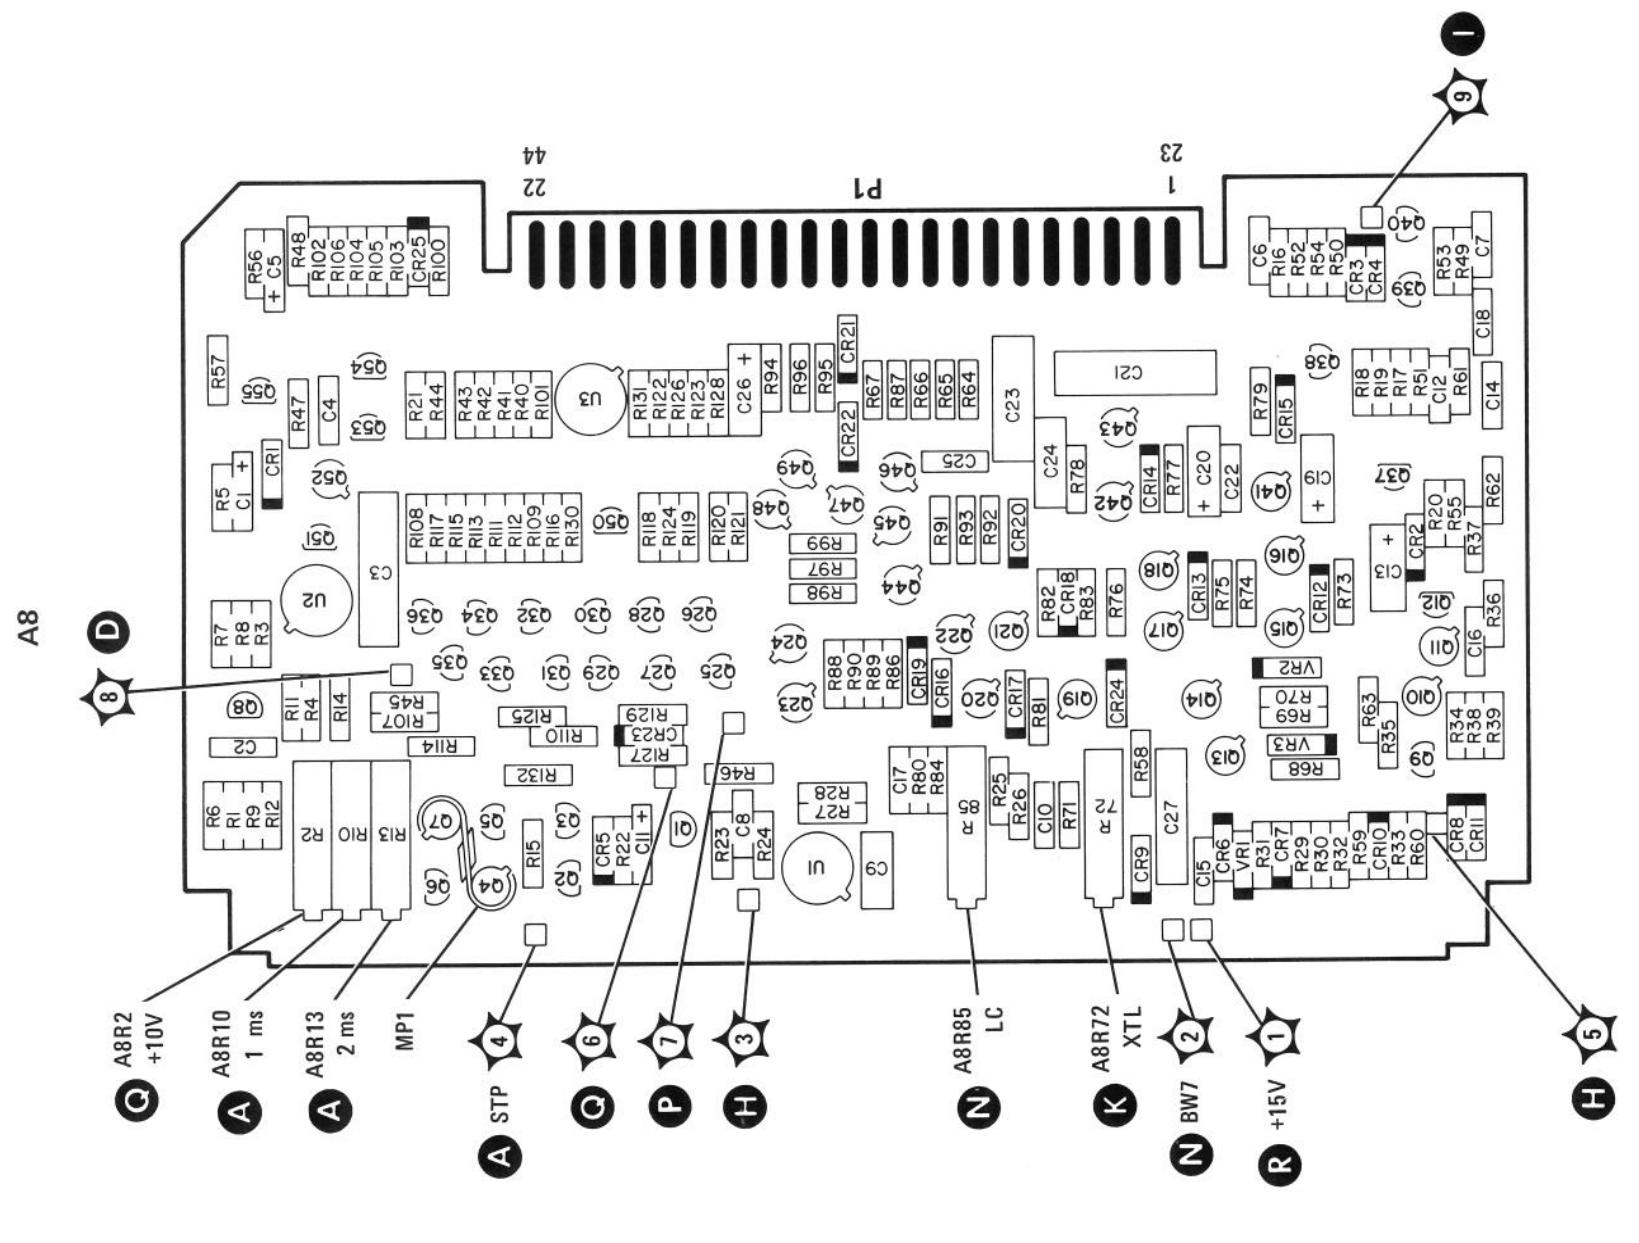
A8 SWEEP GENERATOR ASSEMBLY, COMPONENT AND TEST POINT LOCATIONS (2215A &amp; BELOW)
